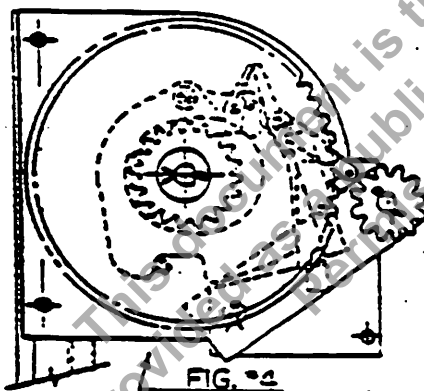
Install Main Gear to barrel shaft using spacer and washers as required, secure in place with key and cotter pin. If a chain hoist is required with this door, remove it from the Pivot Arm before installing the Main Gear, after the Main Gear is in place reassemble the chain hoist.
